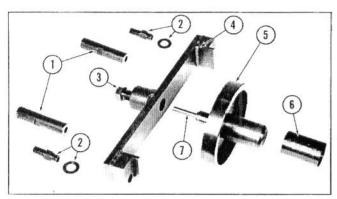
MFN 245UK Pre-Load Tool (As Used for Planetary Type Axles)
